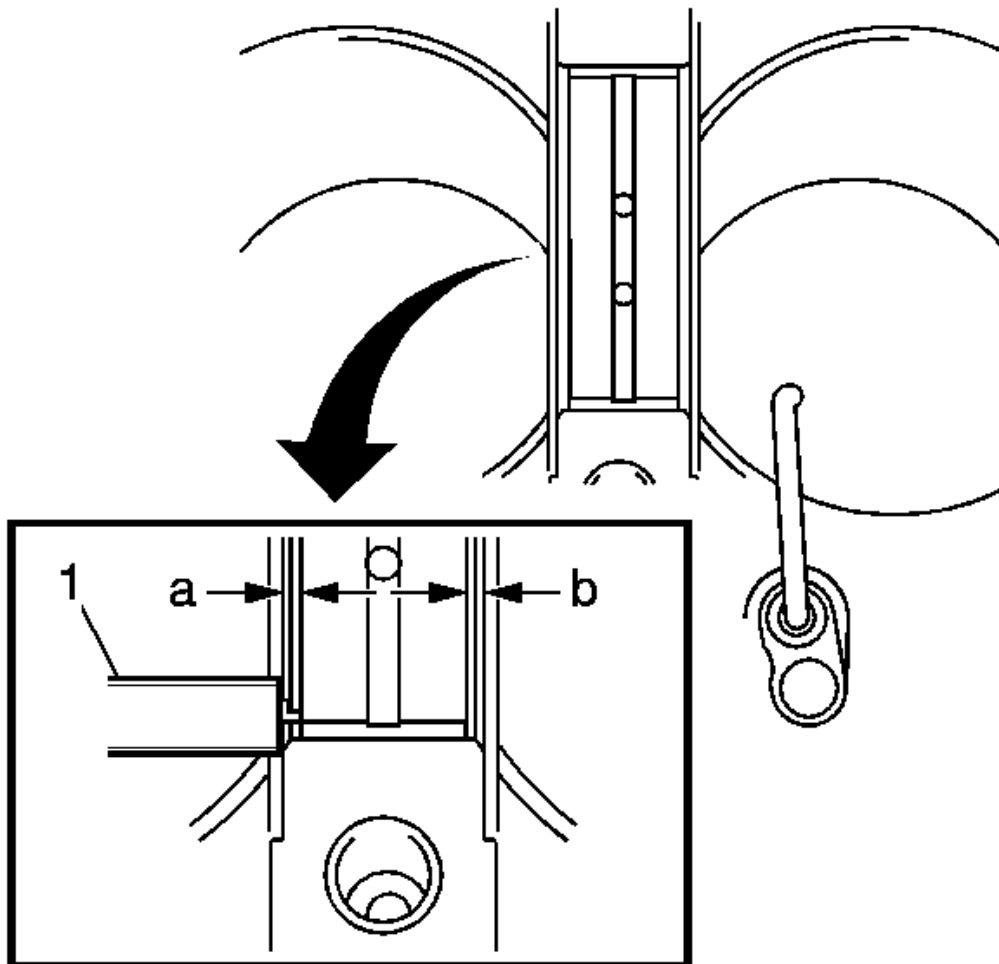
Identifying Upper Bearing With An Oil Groove On Cylinder Block
